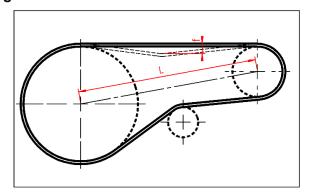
Checking the chain tension,  $f = 0.1 \times L$
